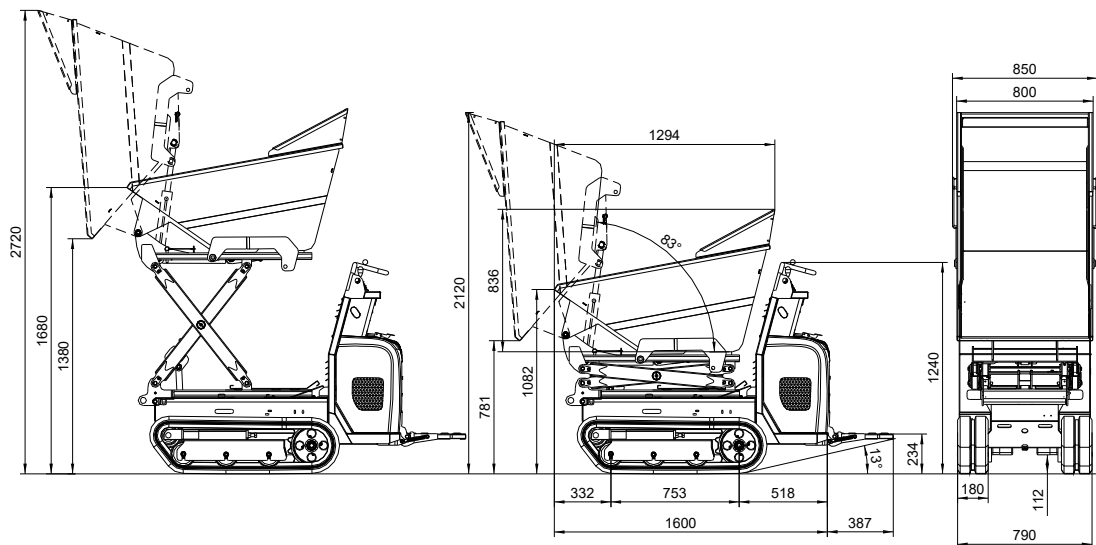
Machine dimensions (model DT08-D with high-tip skip)
